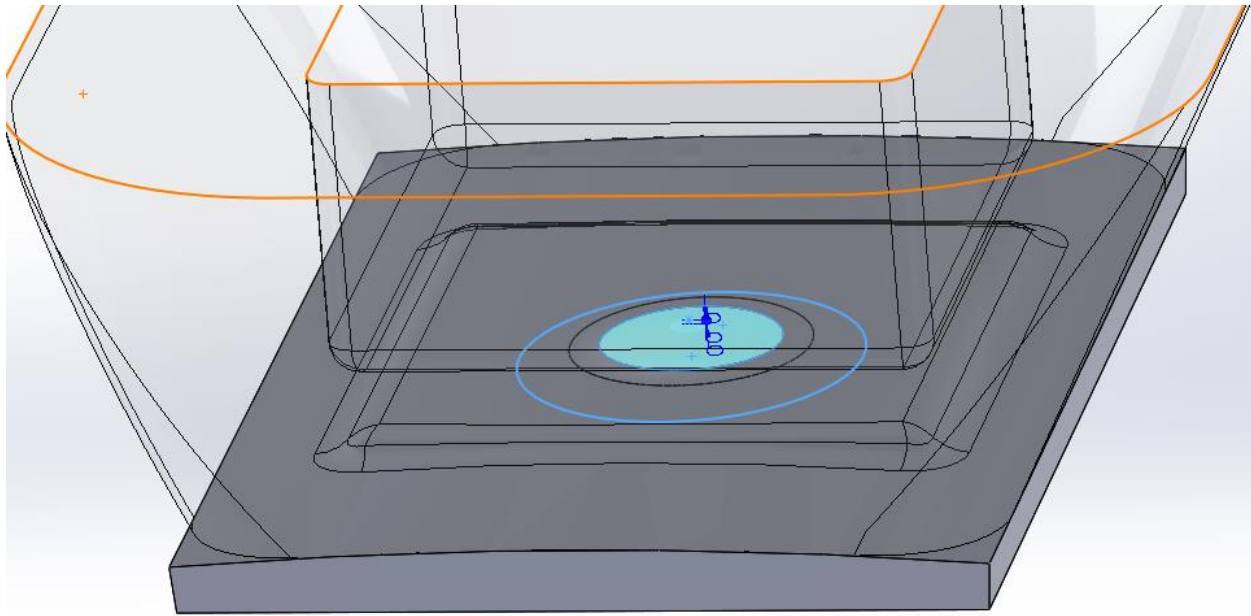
Sketch of "riveting"-gluing process. Tooth shown in red.
